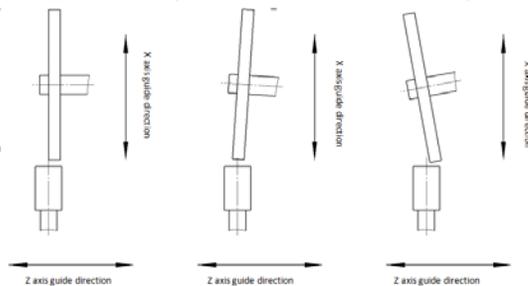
Profile of grinding wheel after dressing with grinding wheel dresser
